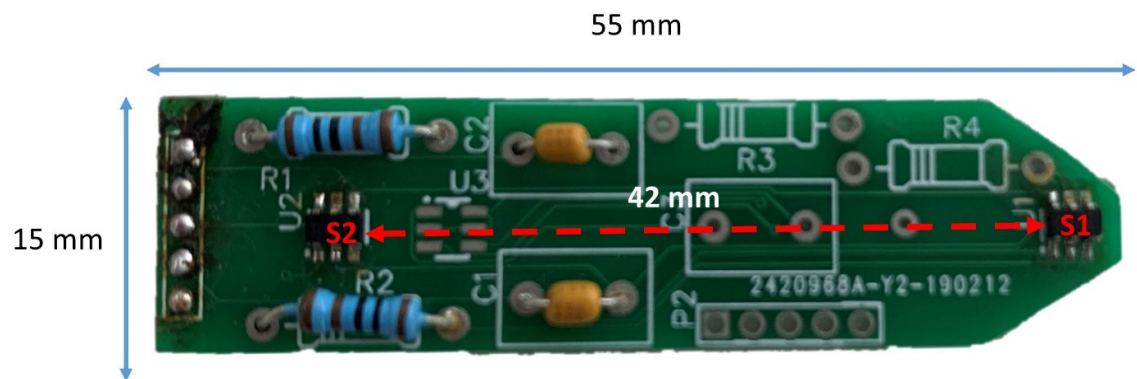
2: PCB layout of Dual sensor Configuration highlighting the position of the sensors and auxiliary components.
